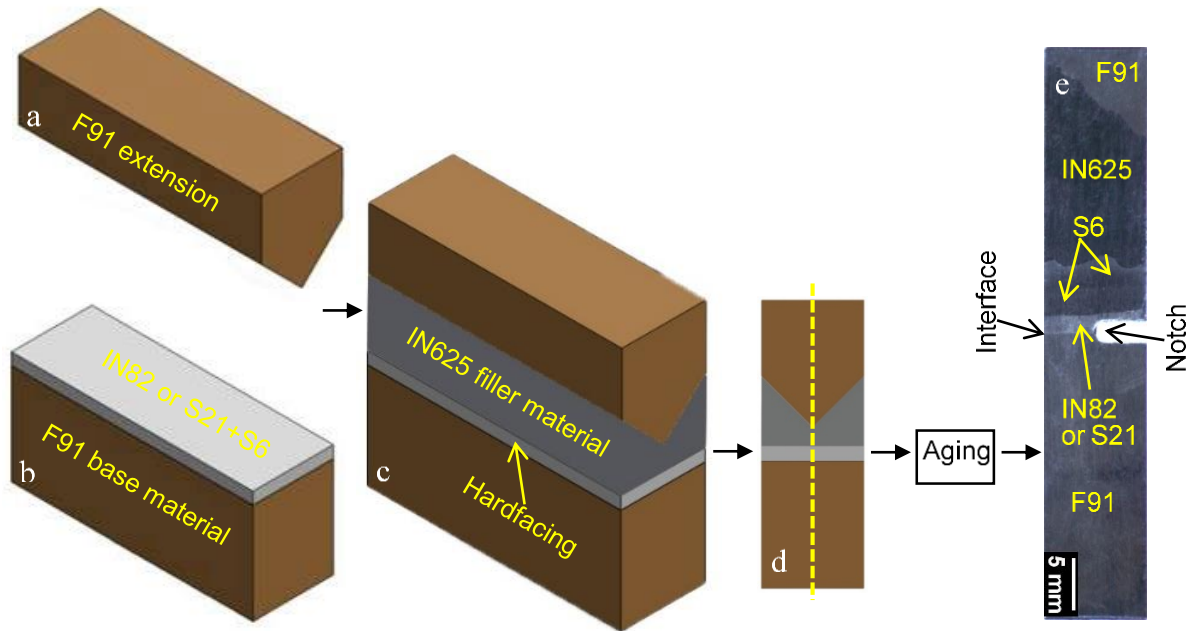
Charpy specimen manufacturing: (a) F91 extension, (b) hardfaced-coating sample with buffer layer of IN82 or S21 and top layer of S6, (c) assembly made by welding an F91 extension to the hardfaced-coating sample using IN625 as the filler material, (d) two halves cut from each bar, and (e) Charpy U-notch specimen machined from the half bars [22].
